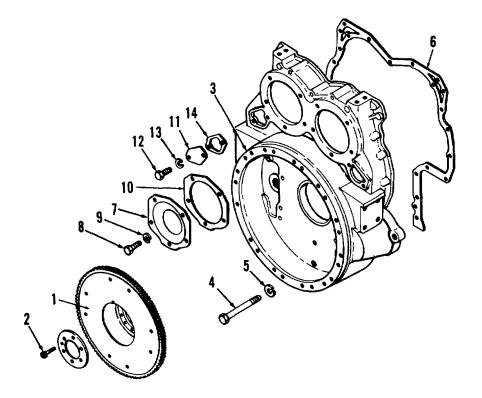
FLYWHEEL AND FLYWHEEL HOUSING
